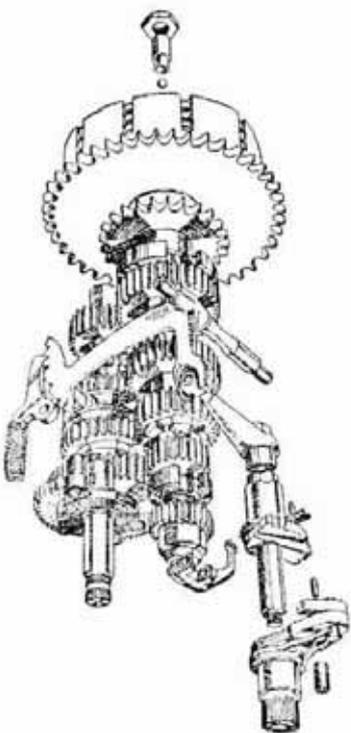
FOOT-CHANGE LIGHTWEIGHT GEARBOX. Showing spring-loaded rocking lever.
